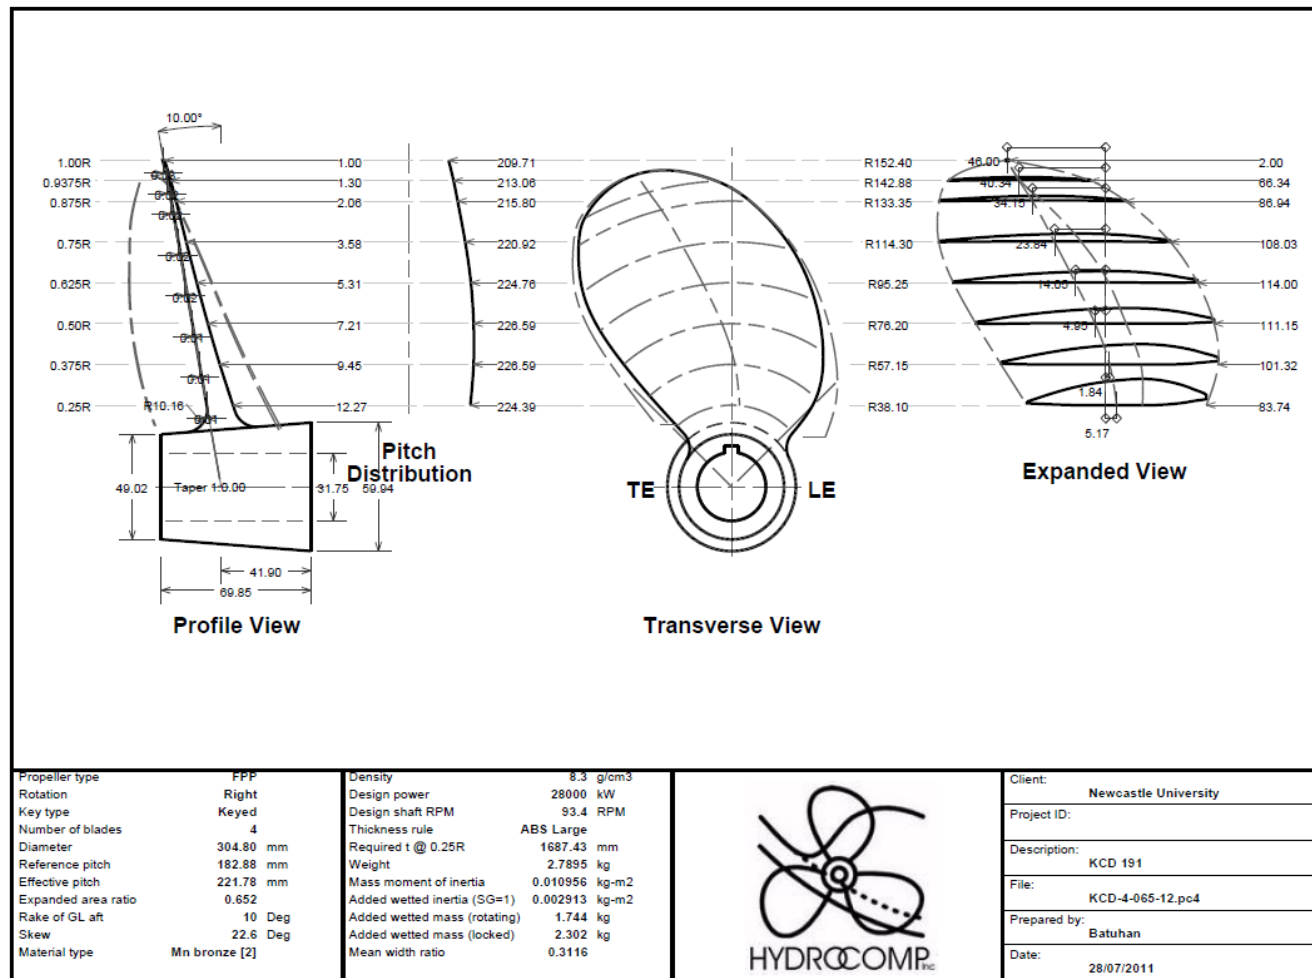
KCD 191 digitized propeller drawings in millimetre units.
